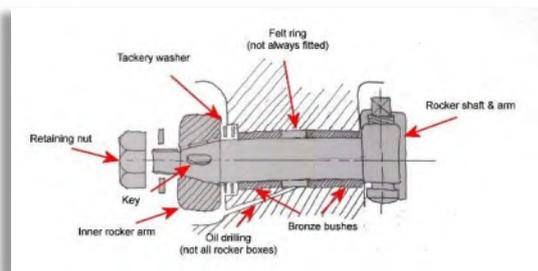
Drawing of the rocker assembly. Courtesy Chris Odling.
